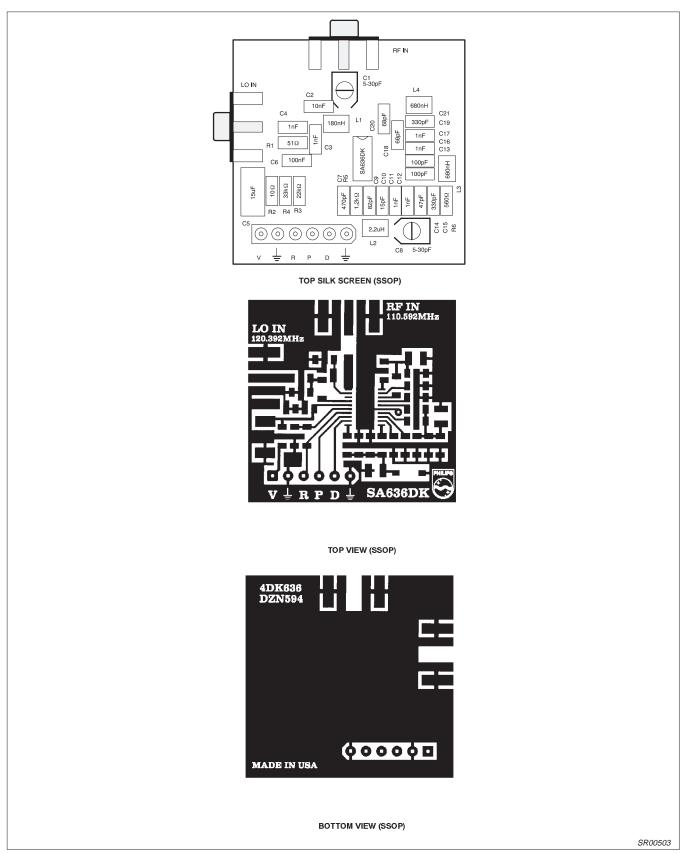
SA636 Demoboard Layout (Not Actual Size)
